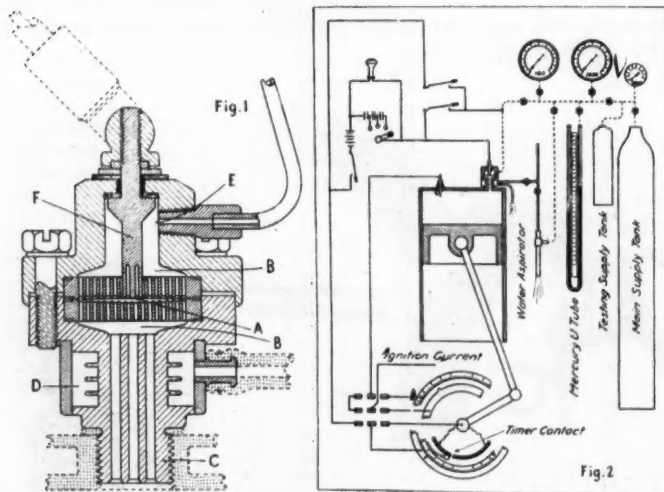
Sectional view of pressure element used in indicator developed at Bureau of Standards
